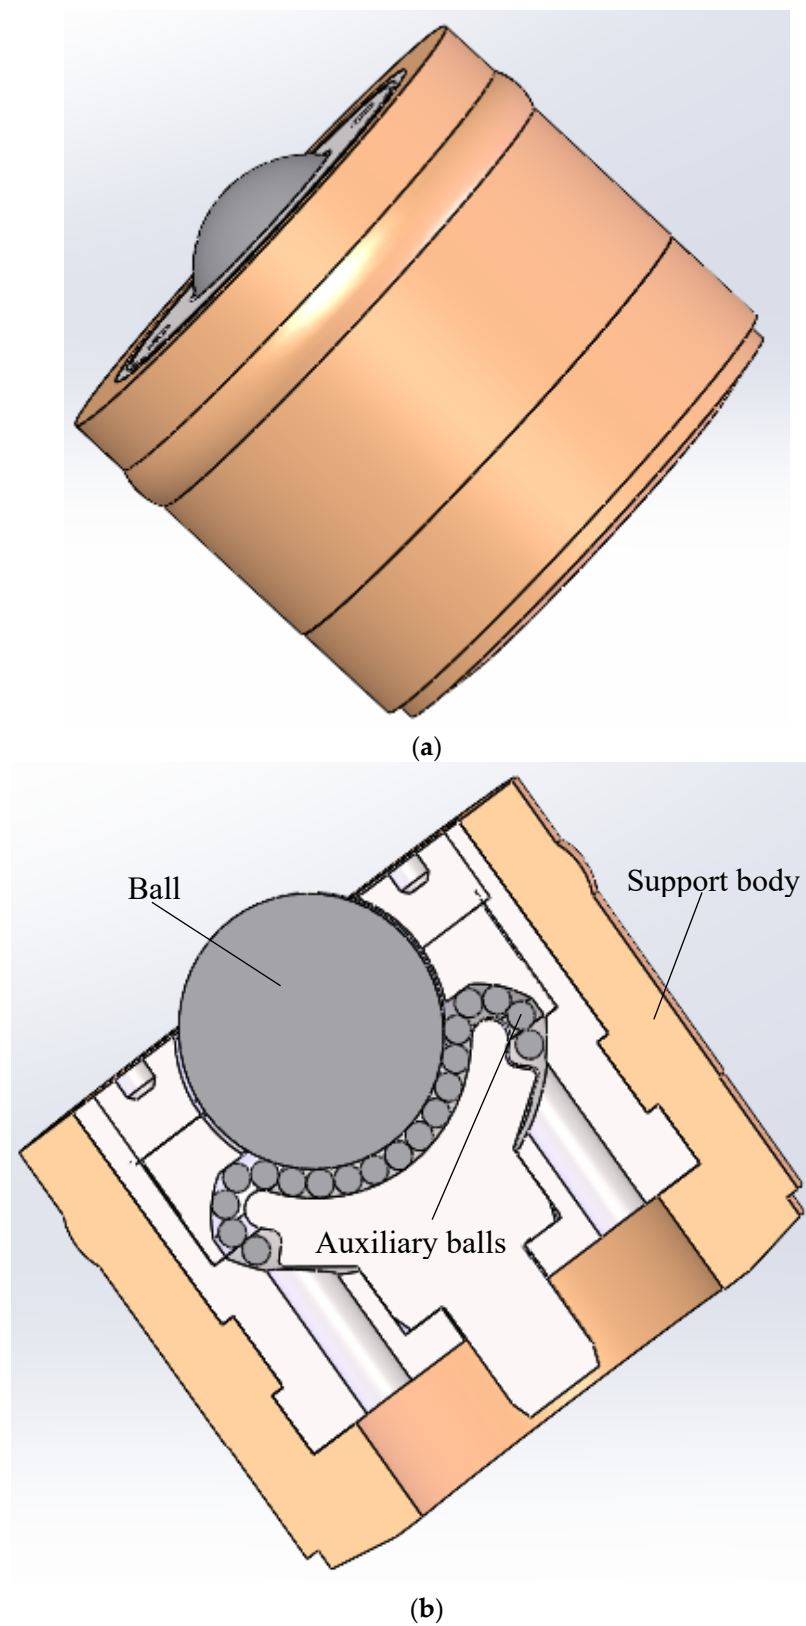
Rolling bearing and auxiliary balls. (a) Rolling bearing; (b) Section view of the rolling bearing.
